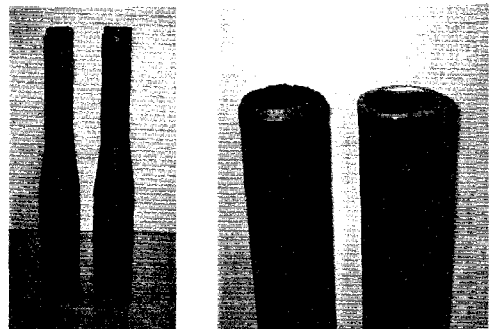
End parts cut from the products(a) and the hydraulic former for tube sinking process(b)
